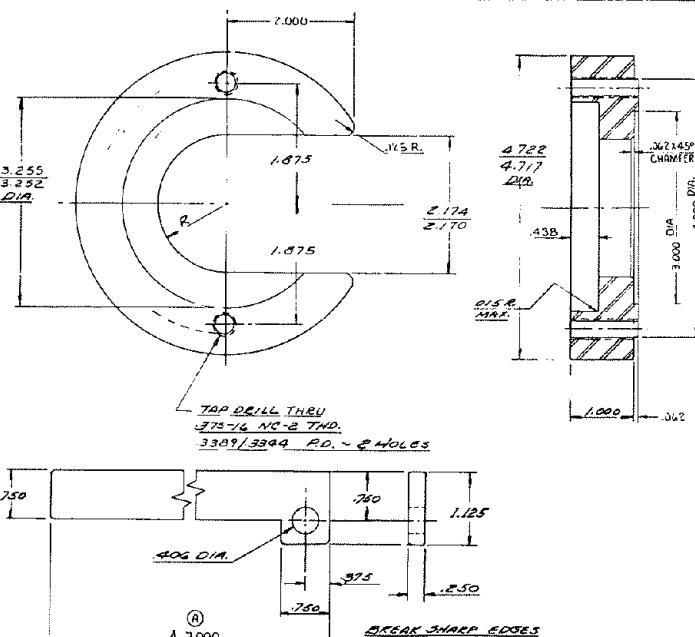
COUNTERSHAFT-FRONT BUSHING AND RETAINER
